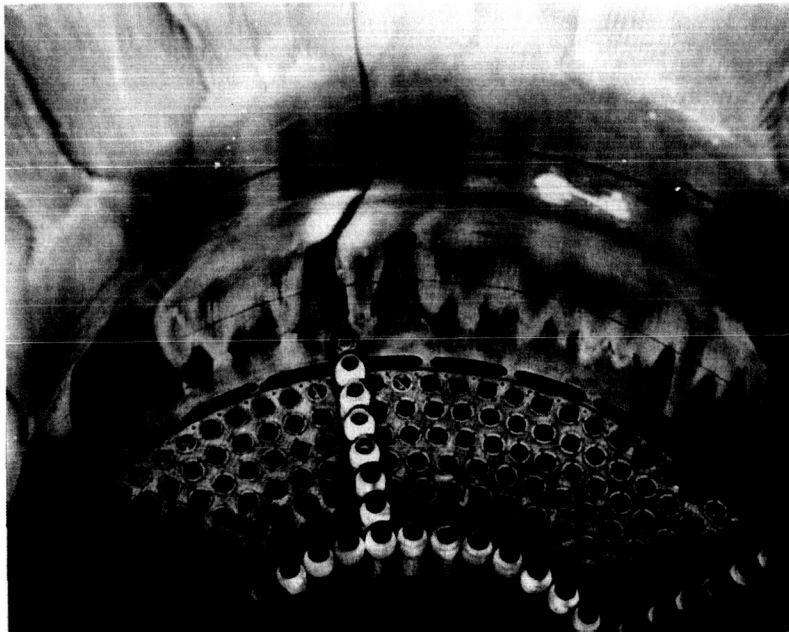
Blanching and cracking—evidence of multi-dimensional environments in a combustion chamber.
